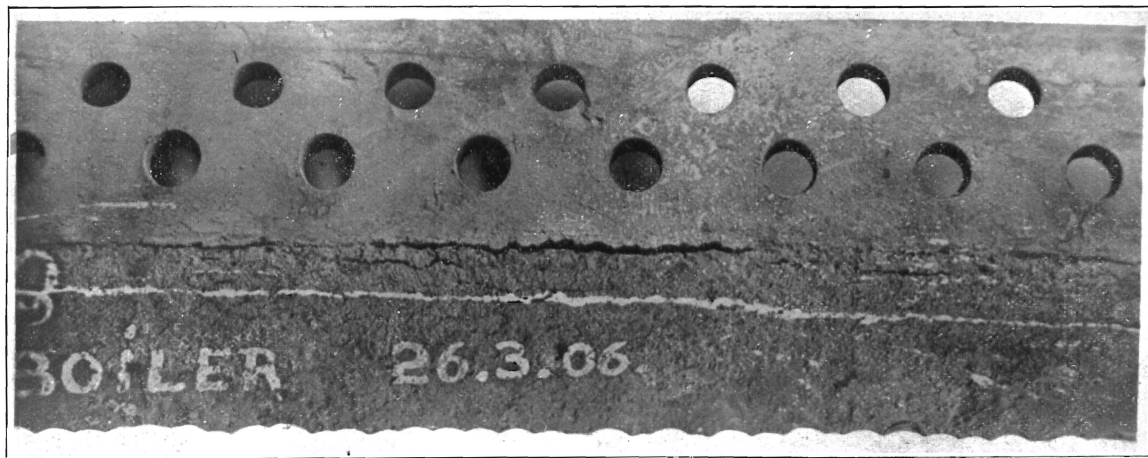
Enlarged View of Portion of Unfractured Plate.
